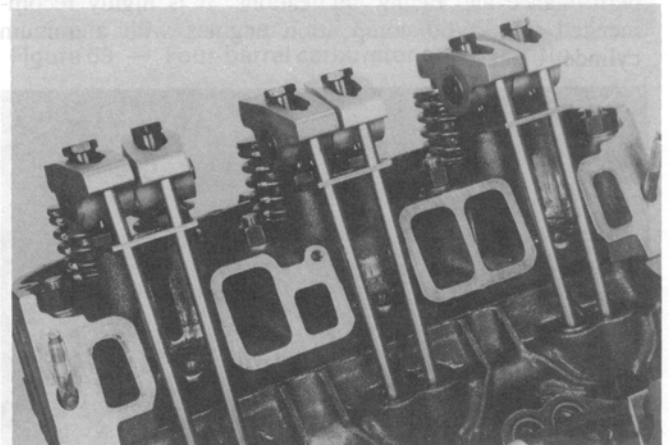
Competition V6 valvetrain includes extra-long pushrods, aluminum rocker arms, modified guideplates, 7/16-inch rocker arm studs, and dual-coil valve springs.
